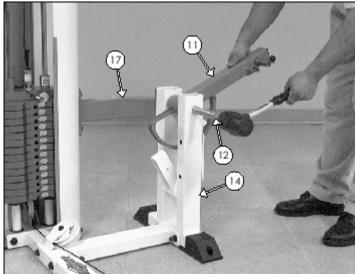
Attach the Pivot Arm (#11) to the Side Frame (#14) in the position as shown above. Next, using a rubber mallet, insert the Pivot Axle (#12) through the holes of the Side Frame (#14) and the ball bearing housing of the Pivot Arm (#11).
